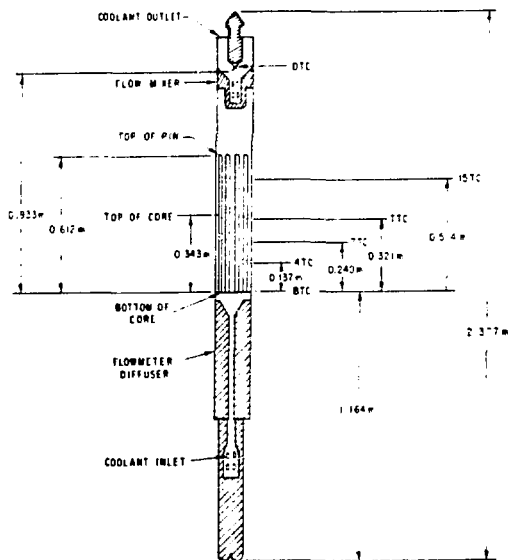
Sketch of the Instrumented Fuel Subassembly, XX08
